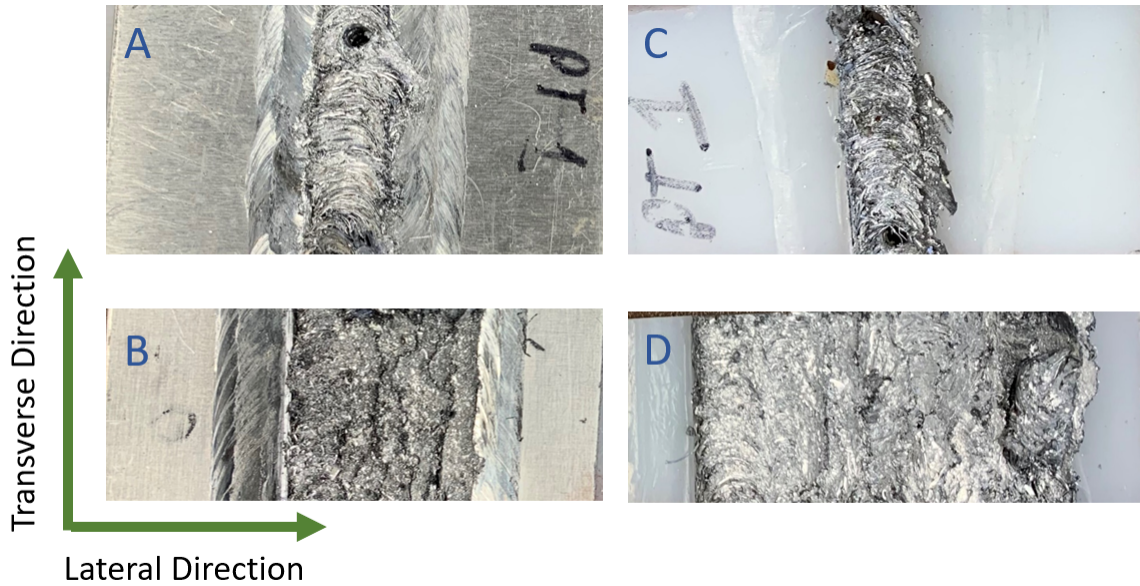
Single (A) and multi (B) pass processed sheet. Single (C) and multi (D) pass processed composite after removing unprocessed aluminum sheet.
